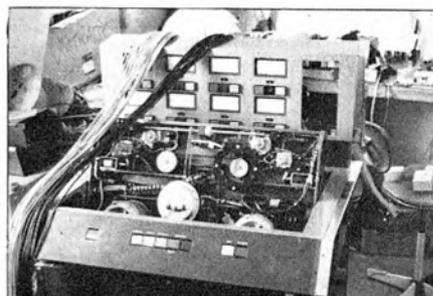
8-track 25.4 mm recorder partially assembled.
